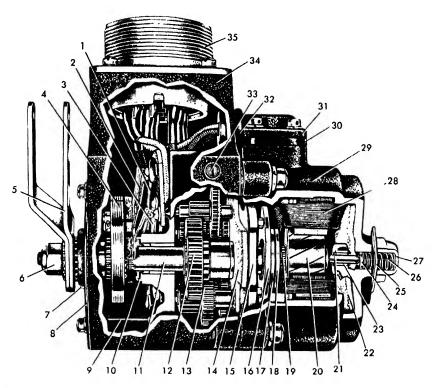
A cutaway view of the waste-gate motor. (1) Potentiometer winding; (2) potentiometer wiper; (3) collector strip; (4) stop plate; (5) crank arm; (6) castellated nut; (7) dust washer; (8) cover plate; (9) mechanical stop; (10) Neoprene oil seal; (11) output shaft; (12) bull gear; (13) gear train; (14) felt oiler; (15) armature-assembly mounting plate; (16) brake plate; (17) brake disk; (18) clutch disk; (19) clutch spring; (20) armature; (21) armature shaft; (22) felt oiler; (23) sleeve bearing; (24) thrust plug; (25) brake-spring lock washer; (26) brake spring; (27) brake-spring cap; (28) stator coil; (29) stator housing; (30) terminal block; (31) terminal block cover; (32) rubber grommet; (33) oil plug; (34) gear housing; (35) connector. (Courtesy Minneapolis-Honeywell Regulator Company)
